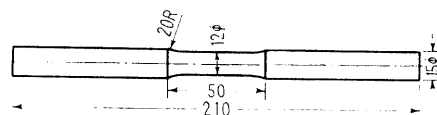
Rotating bending fatigue specimen Sizes are in mm.
